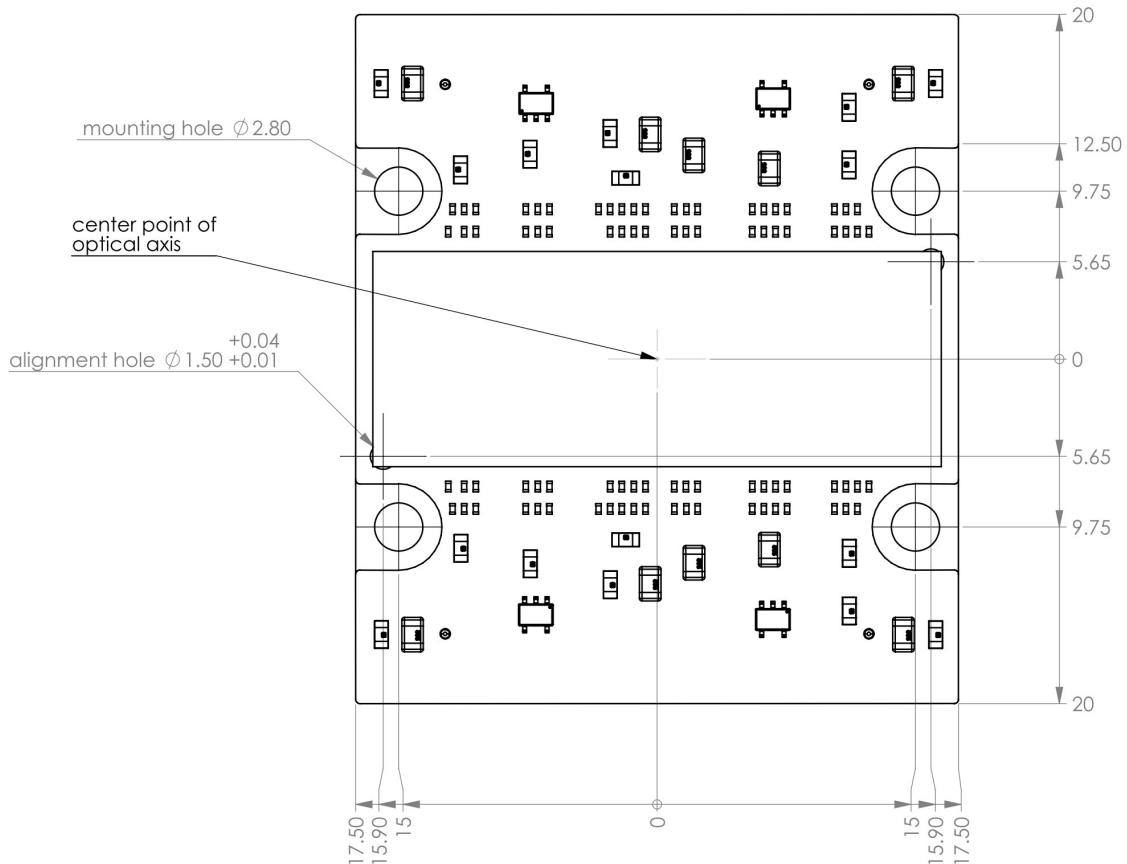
Top view DR-B&W-2x4k-7-Invar and DR-B&W-8K-3.5-Invar. If not otherwise noted all tolerances are +/- 0.1mm
